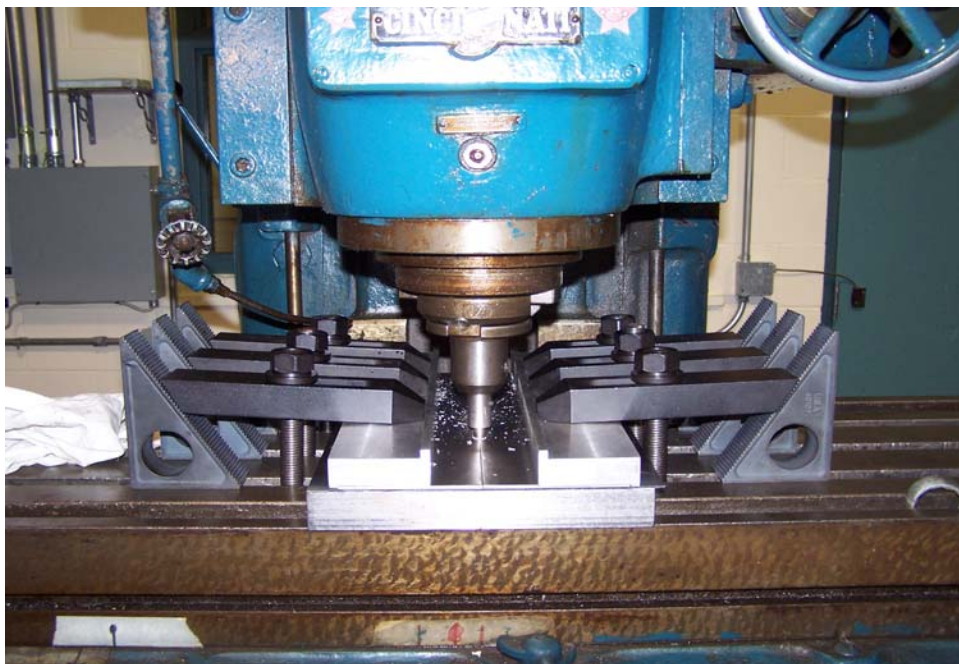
Fixture designed for transformed to transform conventional milling machine into a friction stir welding
